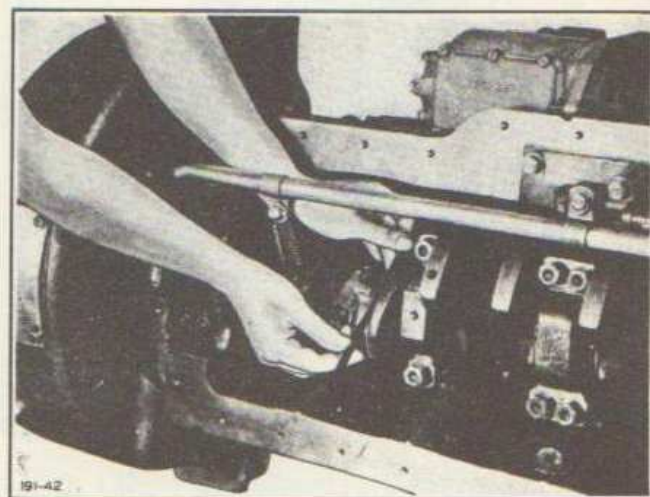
Checking Side Clearances of Connecting Rod Bearing
